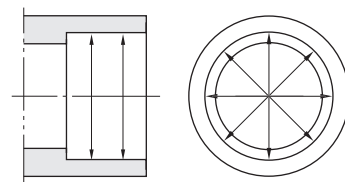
Measuring Positions of Housing Bore Diameter
